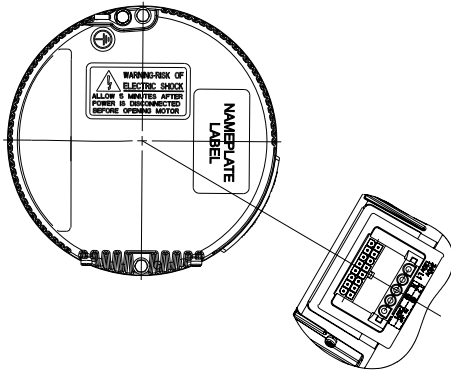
FV4 Motor / ECM5.0 Motor (pre-2023)
